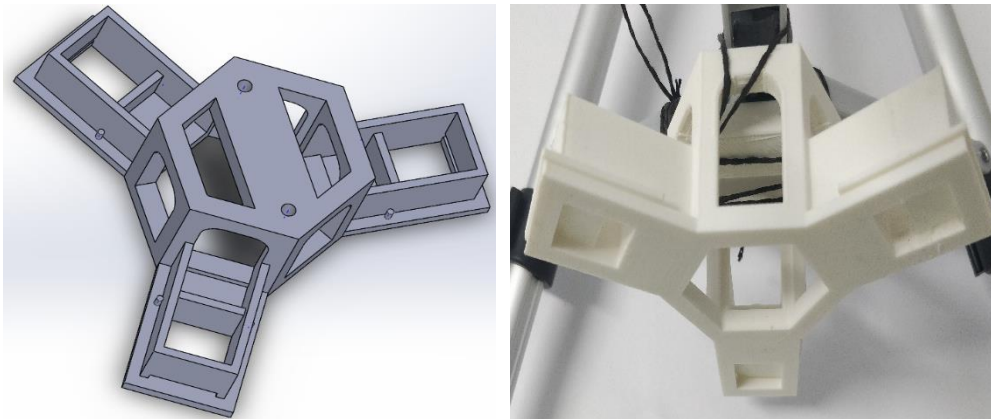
SPA Holder Sketch (left) and 3D Printed SPA Holder (right)
